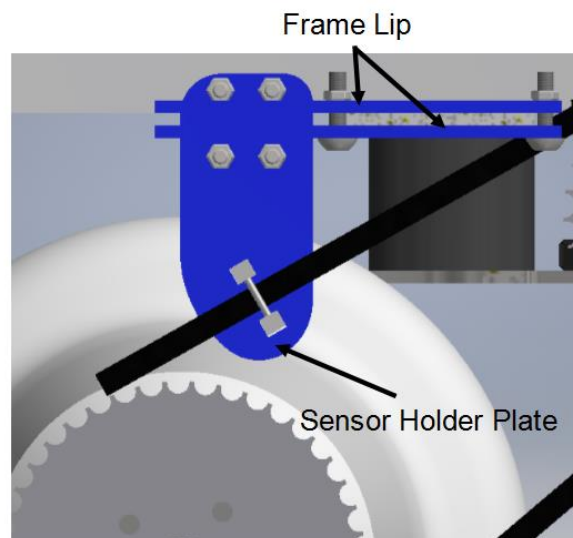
Inventor Assembly for the arrangement of the Driving Wheels
